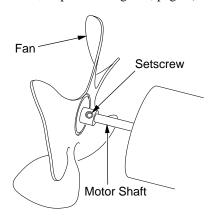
Fan, Motor Shaft, and Setscrew Location
